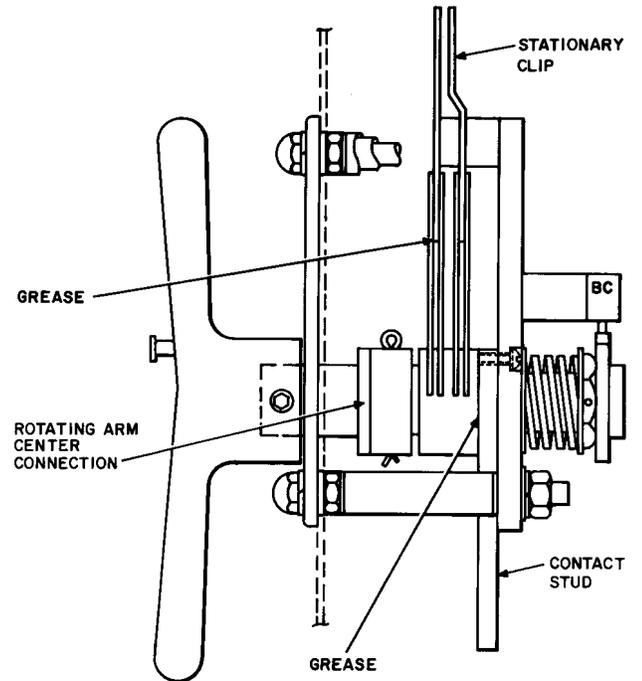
Side View of S3 Switch Used on L21 and L22 Rectifiers
